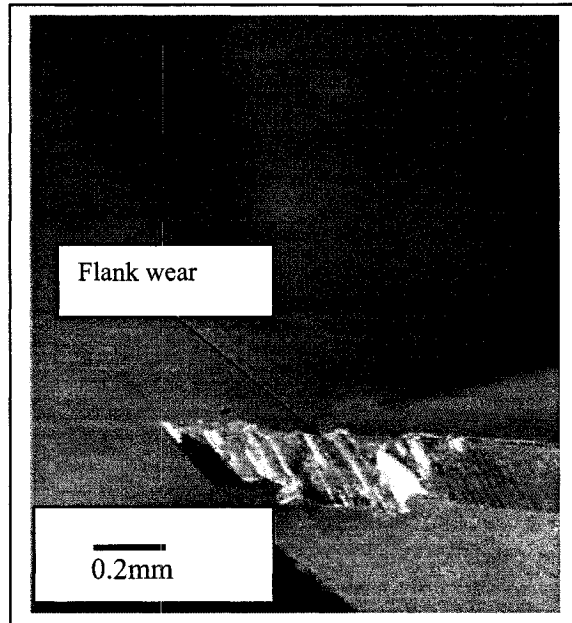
Wear, cutting speed= 90 m/min (1505 rpm), depth of cut = 1.8 mm, feed = 0.05 mm/tooth, stable cut
